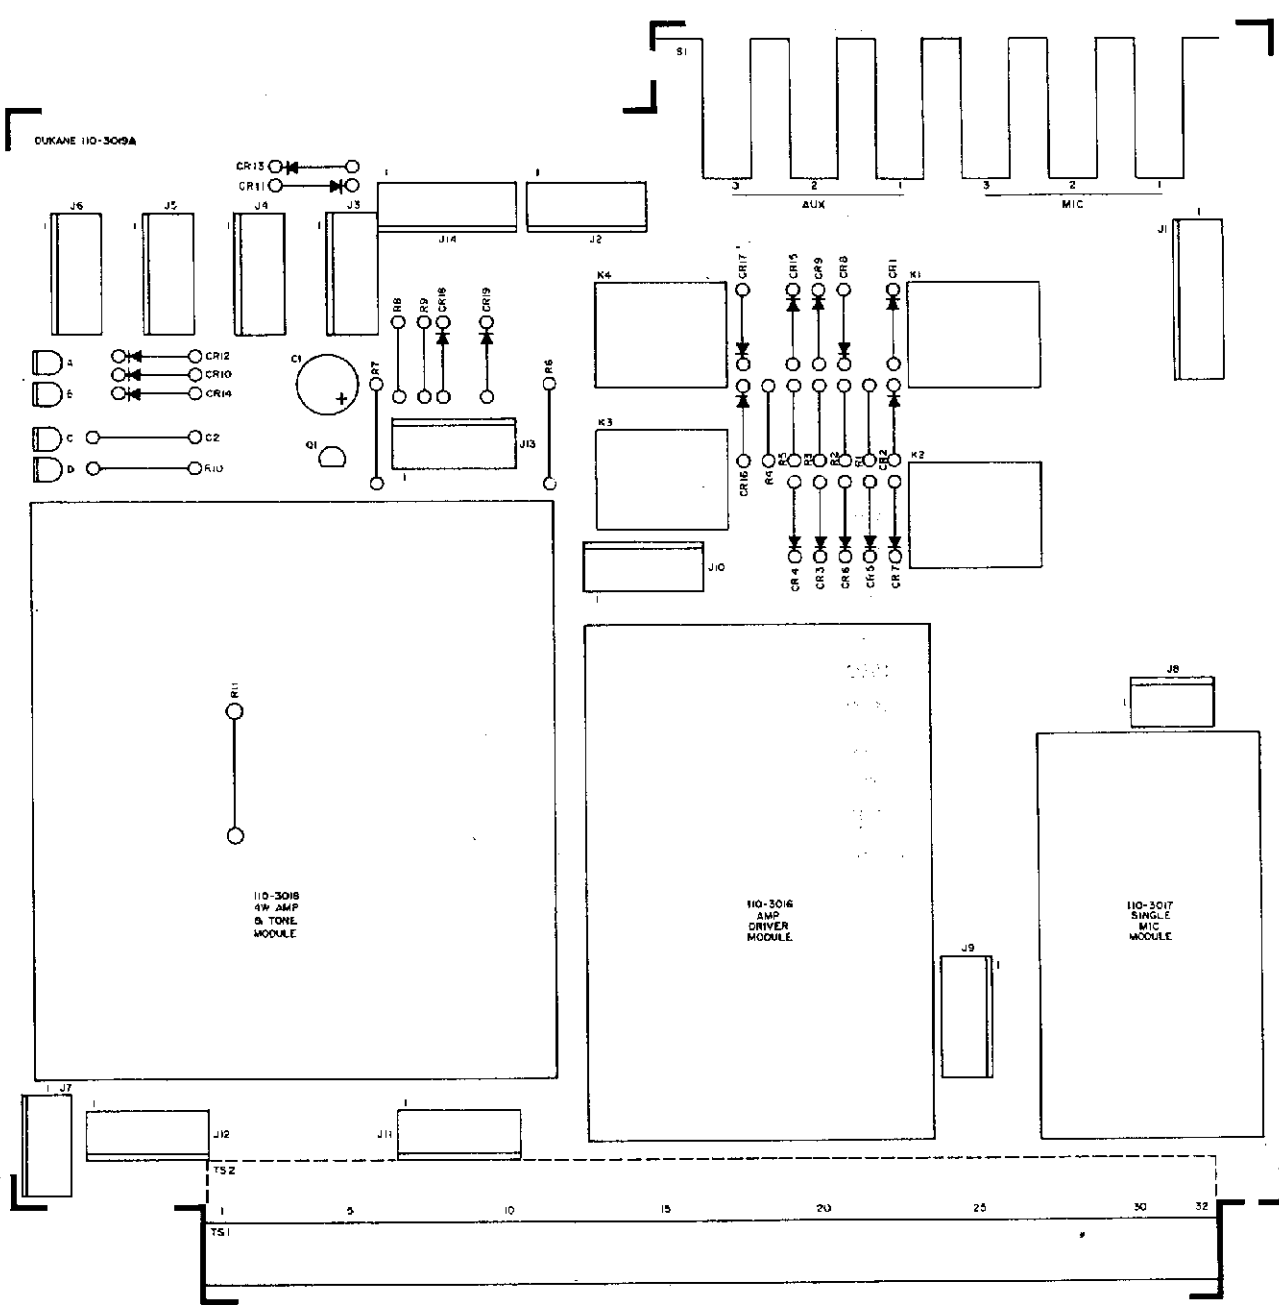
Parts Layout on 110-3019A Switch Connector Module
